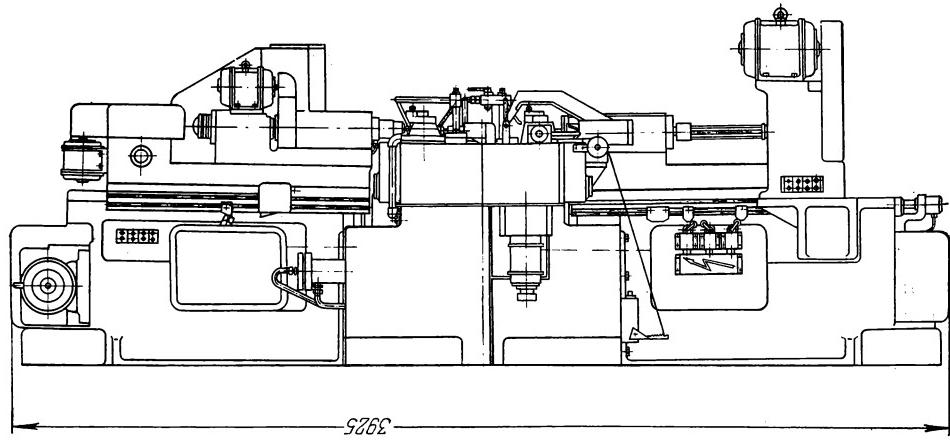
Transfer machine for machining the wristpin hole in pistons clamped in sets of four on pallets
